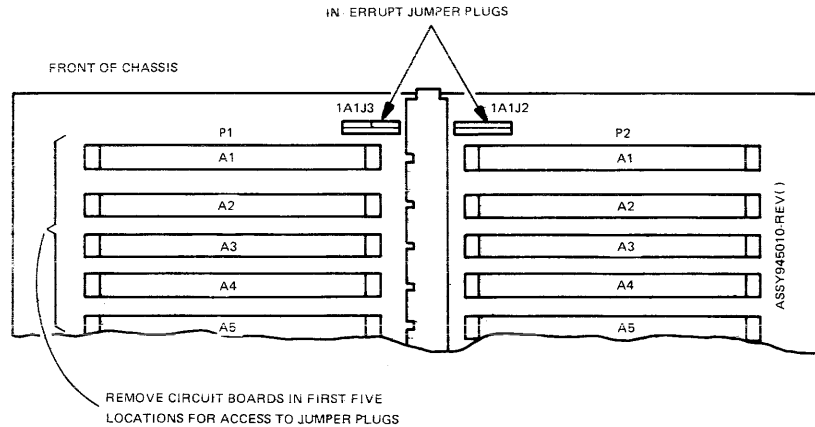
Location of Interrupt Jumper Plugs (6- and 13-Slot Chassis)
